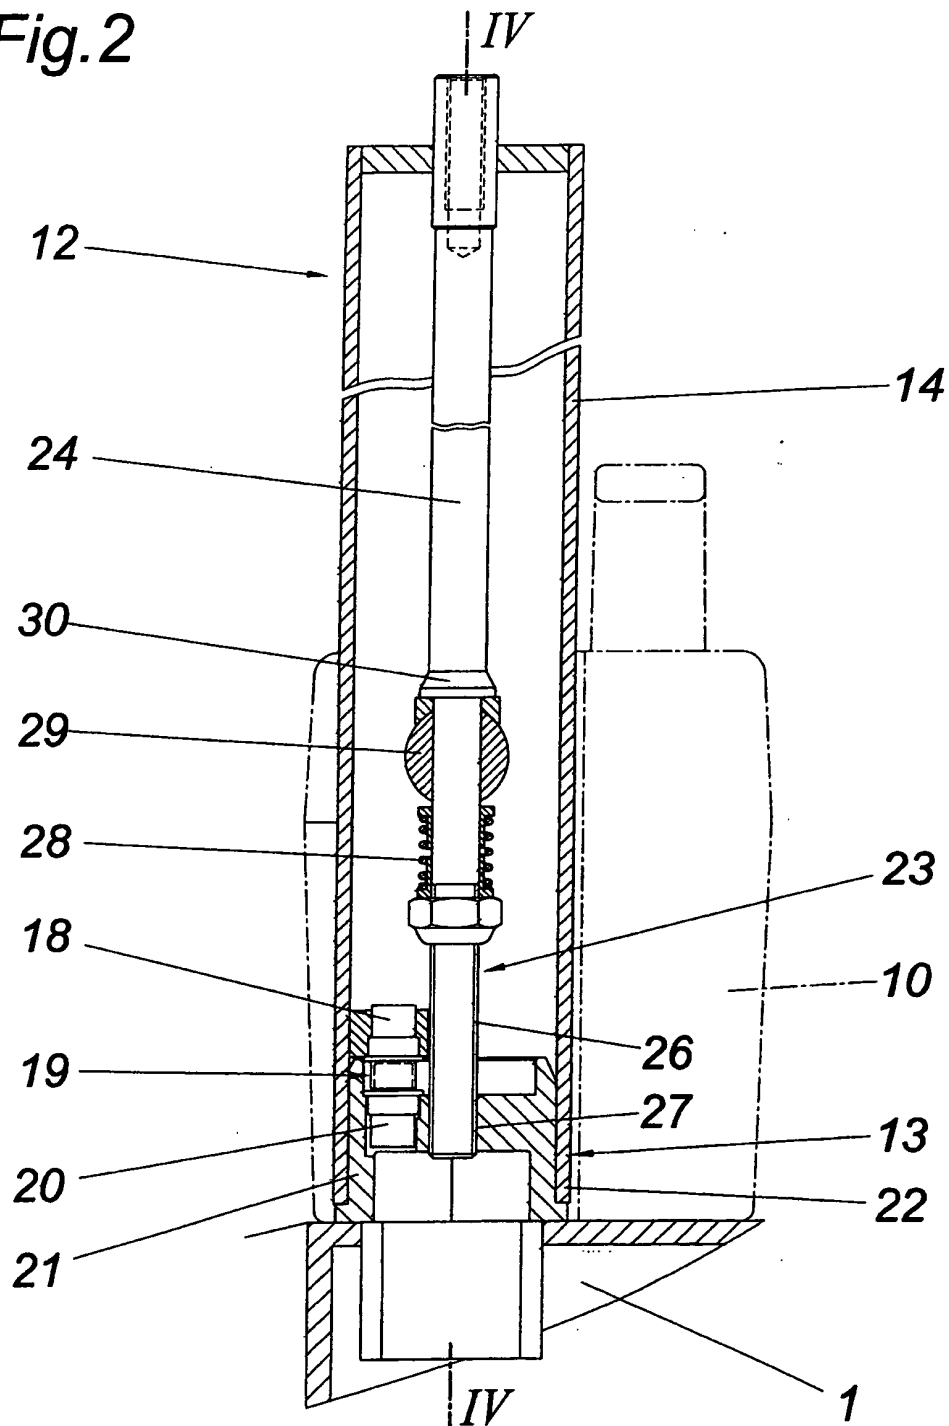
is a cross-sectional view of a mechanical assembly. A central shaft (12) passes through a housing (14). The shaft has a threaded section (24) with a nut (28) and a spring (29). A piston (23) is at the bottom of the shaft, with a seal (26) and a gasket (27). The assembly is mounted on a base (1) with a flange (21). A container (10) is shown to the right of the shaft.
